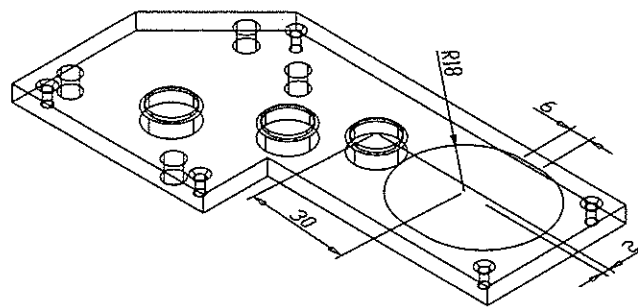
Profile extruded to cut, oval-shaped profile constructed
